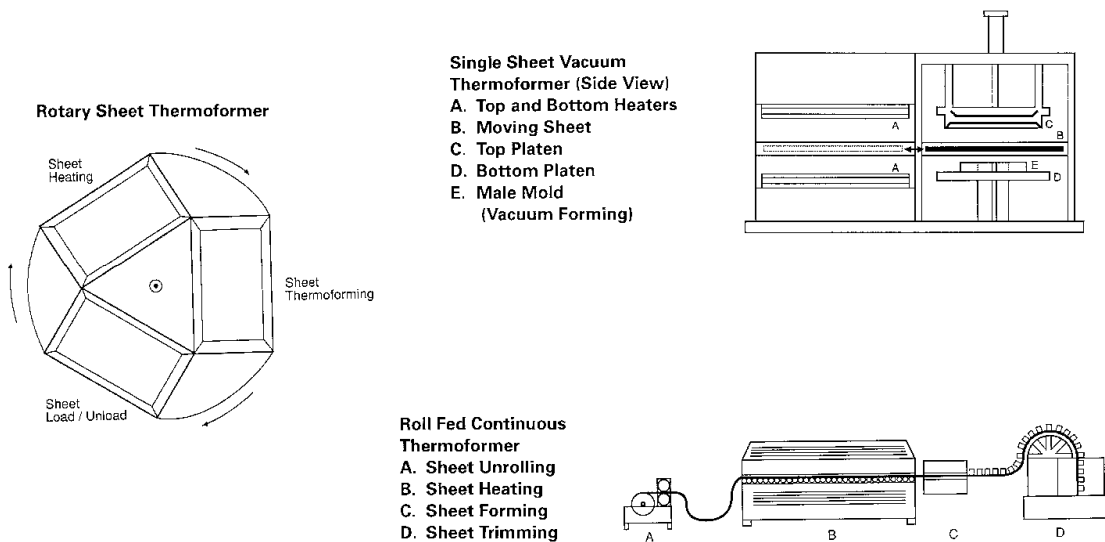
illustrates how the thermoforming process can be sheet fed (single stage and cyclic thermoforming) or roll fed (continuous). Larger parts and thicker sheet engage the rotary process. Generally, smaller parts using sheet less than 0.125 in. (3 mm) thick use a continuous process. In a continuous process, the length of the oven or number of oven stops is important. A minimum of four stops is recommended for sheet thicker than 0.030 in. (0.75 mm). Separately controlled heater zones are desirable for top and bottom, sides and middle, and front and back.
